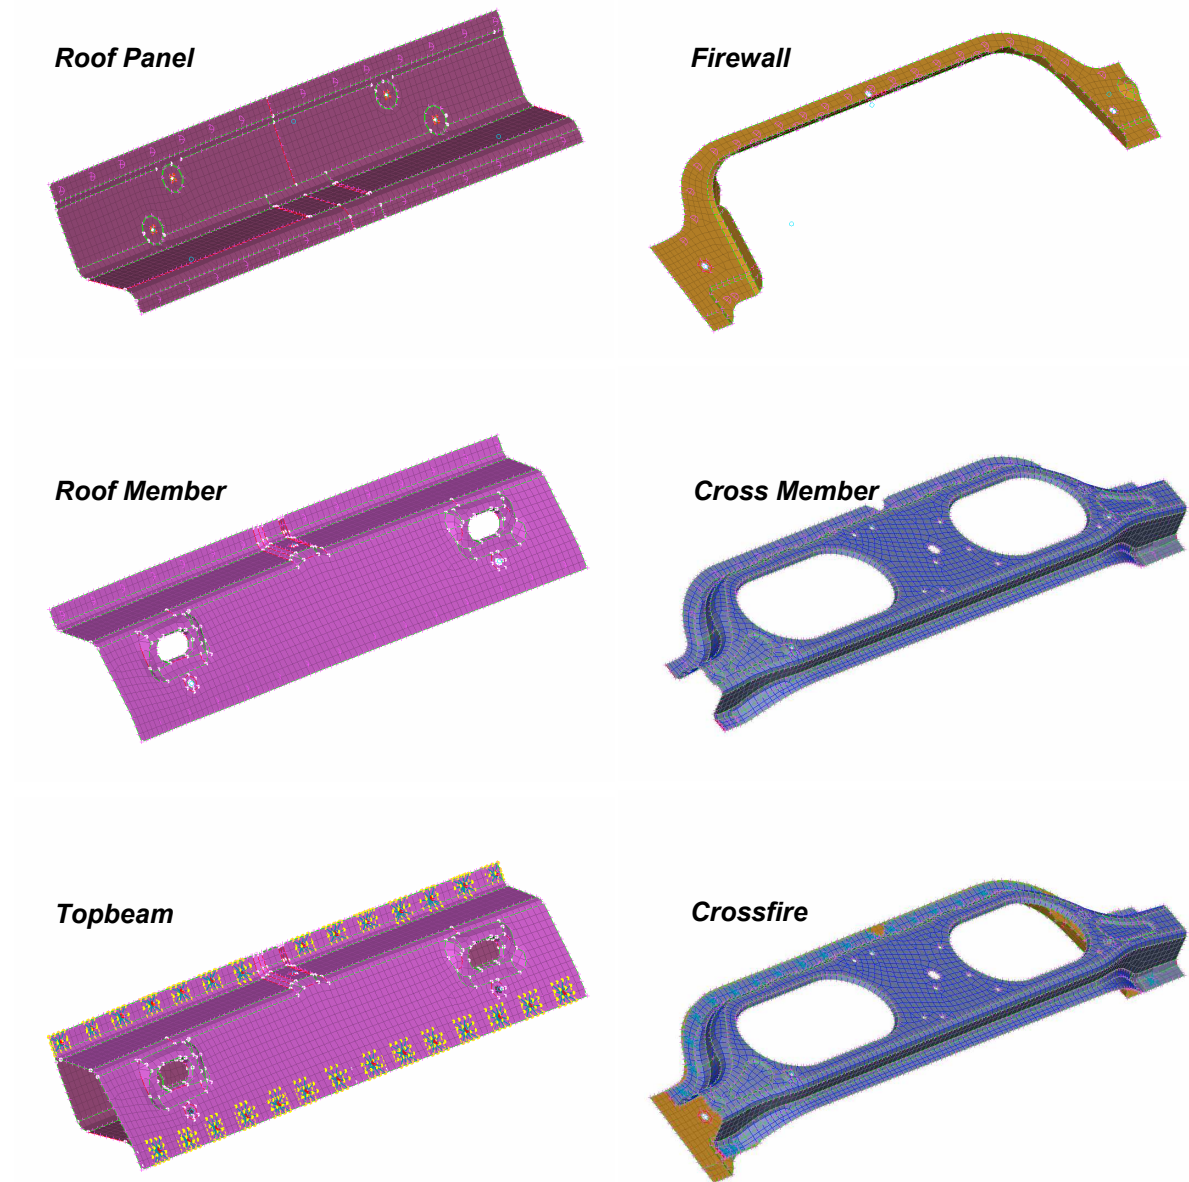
FEM models of the test pieces. In each column, the single parts and the welded assembly are shown.
